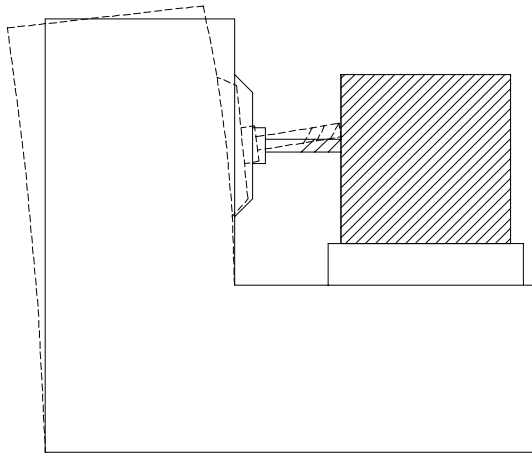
Machine deformation due to cutting forces and thermal expansion.
